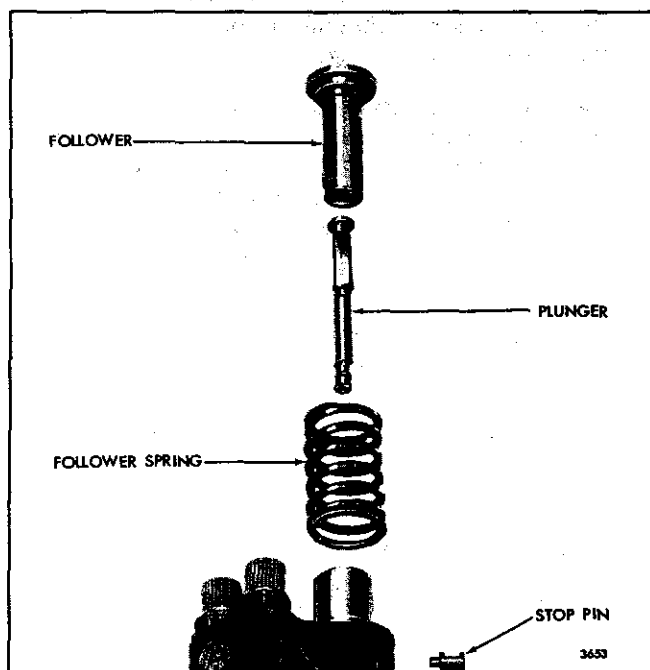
Injector Plunger, Follower and Relative Location of Parts
